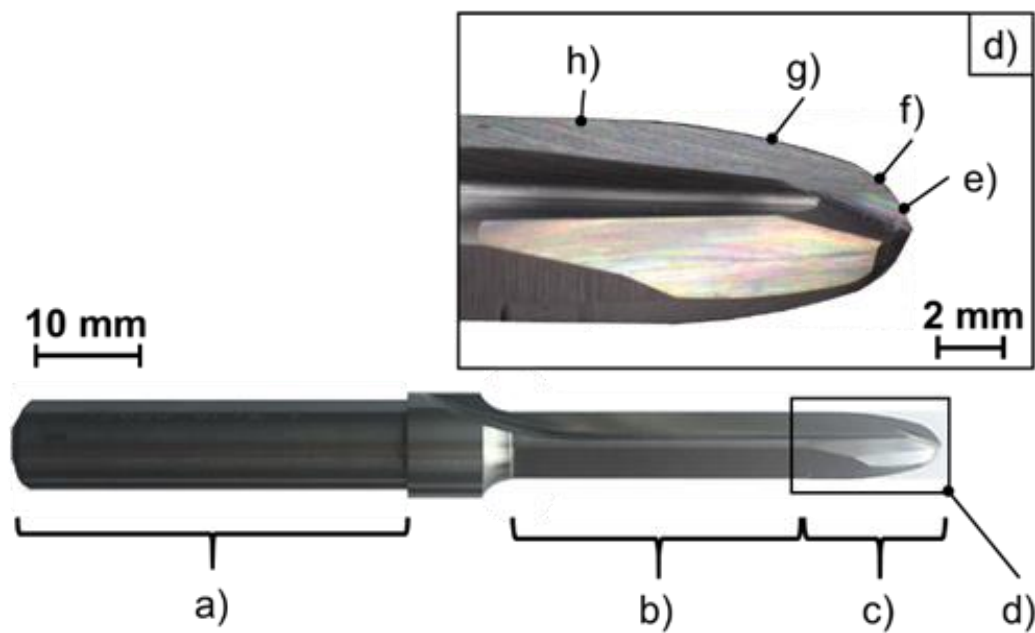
One-shot WC-Co drill utilized in the current study: (a) drill shank; (b) reamer cutting portion; (c) cutting edge portion; (d) magnified view of the drill cutting edge portion; (e) primary cutting edge; (f) rounded corner; (g) secondary cutting edge; (h) tertiary cutting edge
